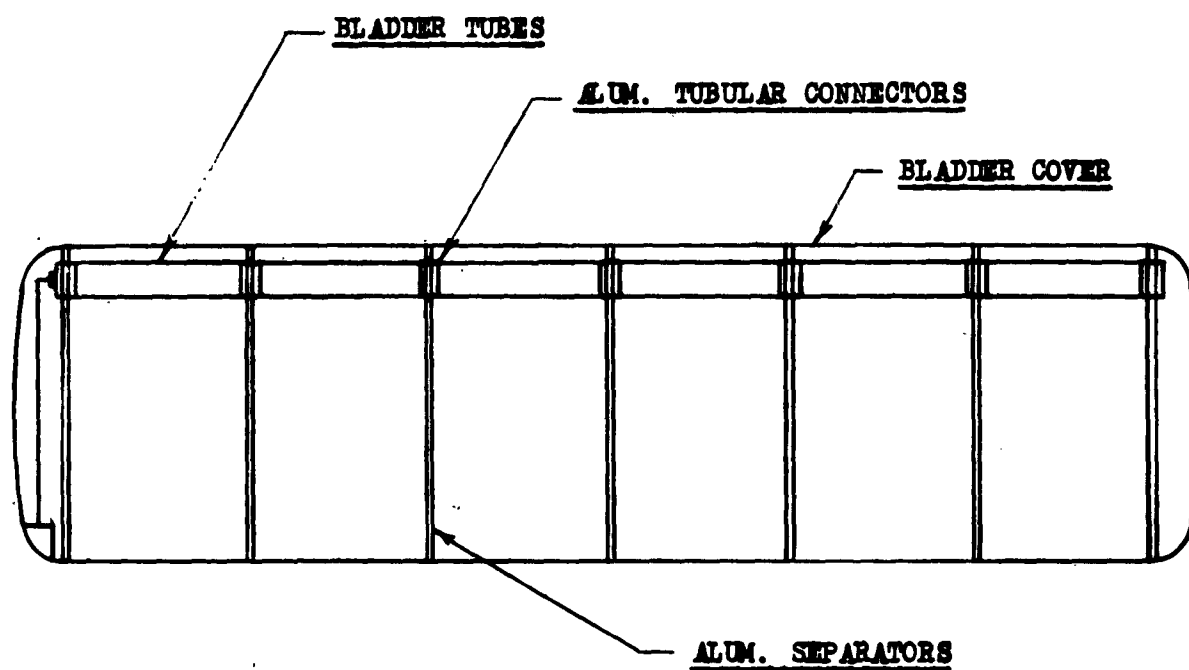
HORIZONTAL BLADDER TUBE TANK, DESIGN TWO
